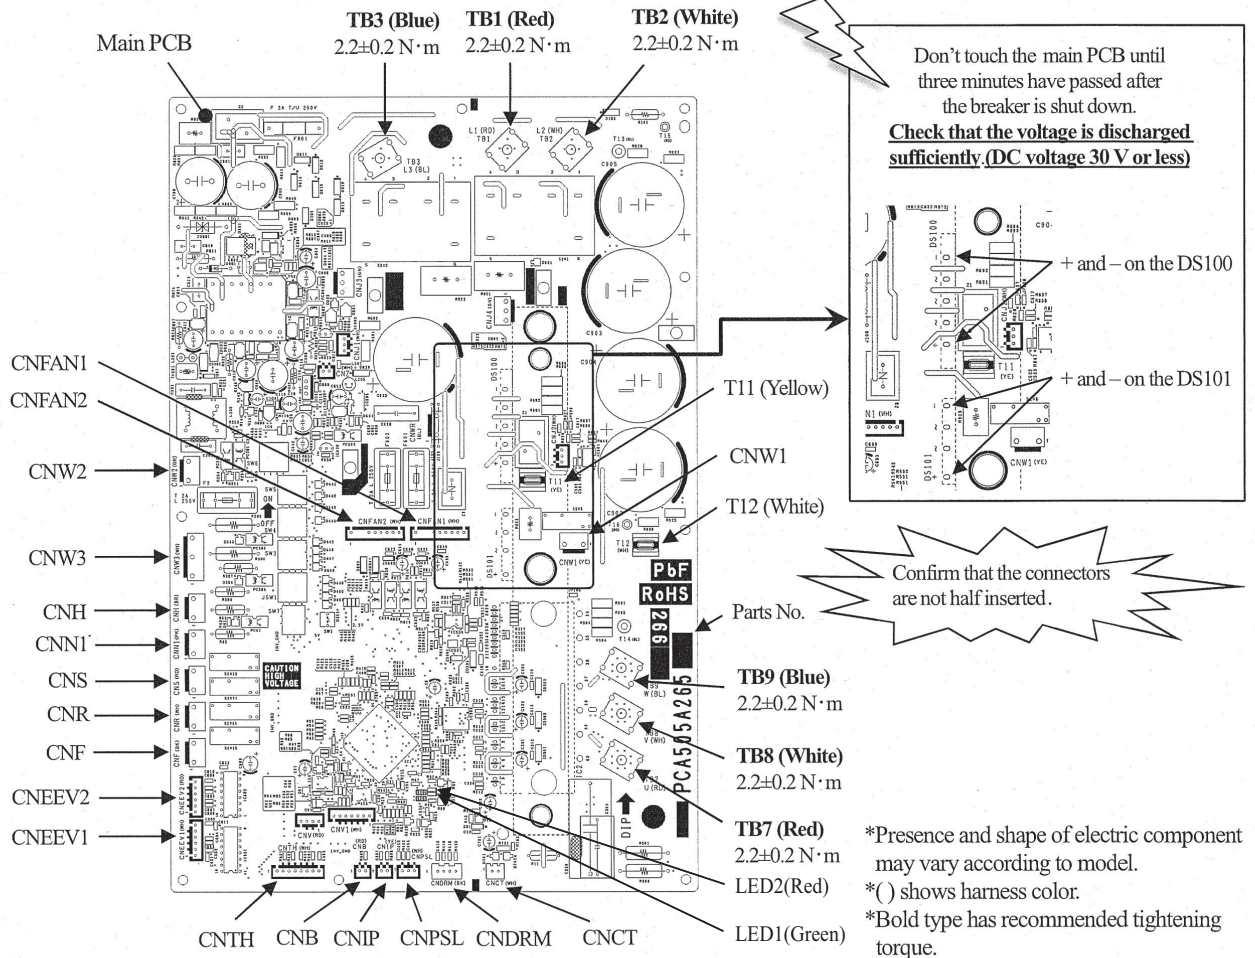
Parts arrangement view of main PCB and voltage measurement points
